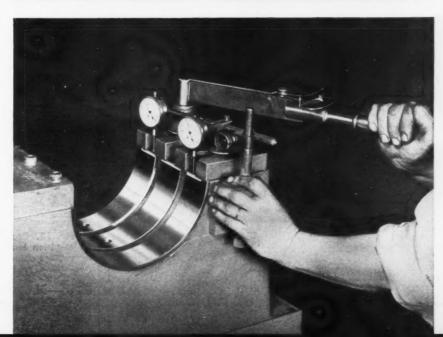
The bearings are clamped in an inspection fixture with a force measured by a torque reading to insure uniform load on the bearing.
